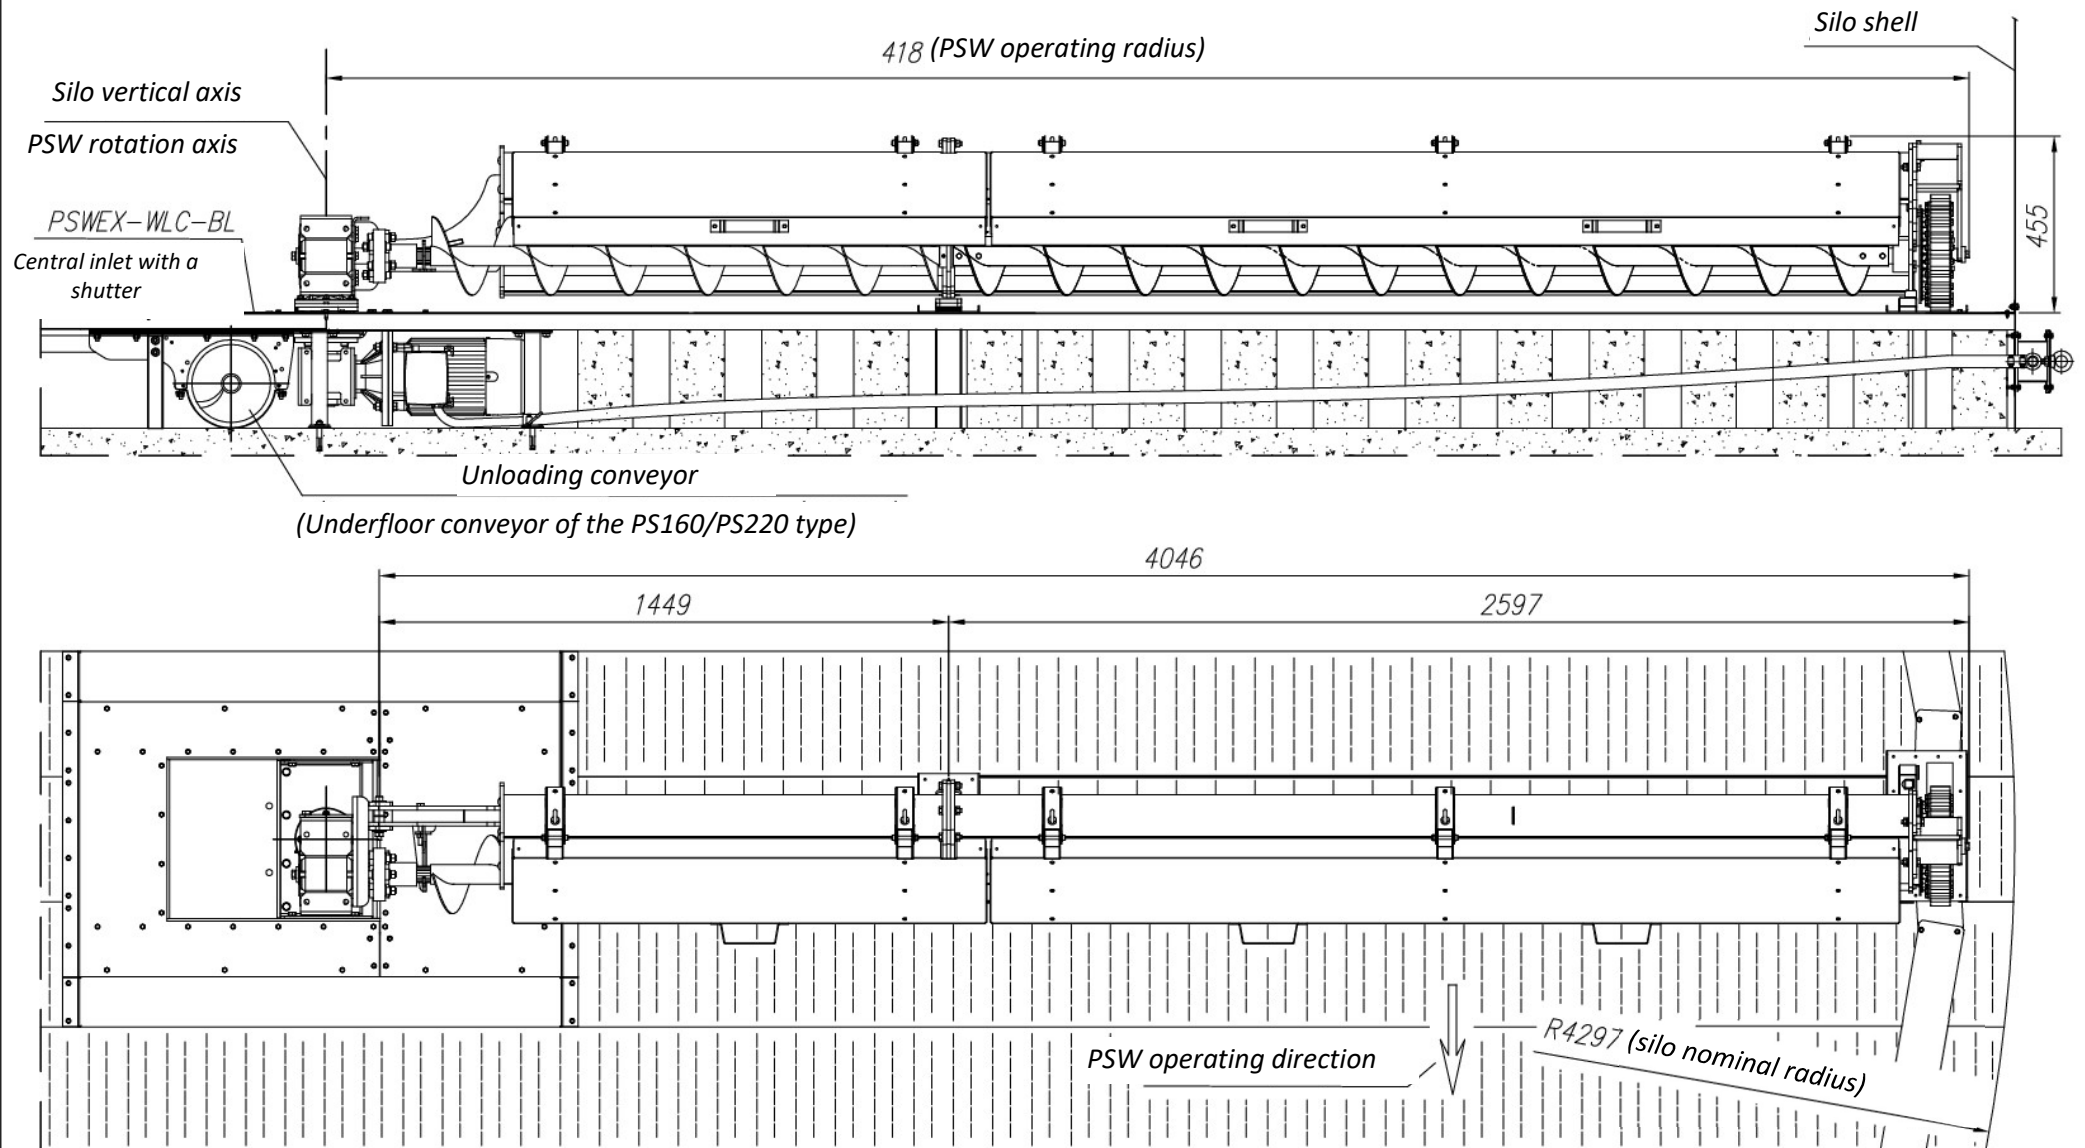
Basic installation dimensions of the internal screw conveyor, of the PSWEX-9 type (dimensions as mm).
